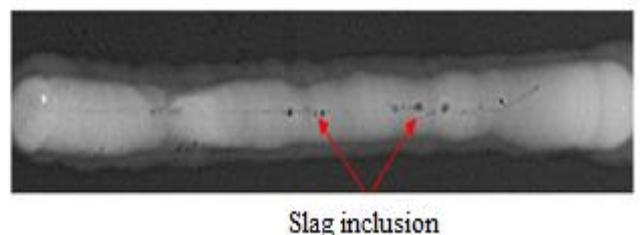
Radiography image showing slag in the weld joint.[21]
